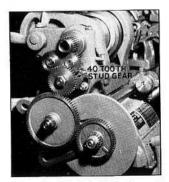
Model A Lathe set up for cutting threads 4 to 7 per inch
